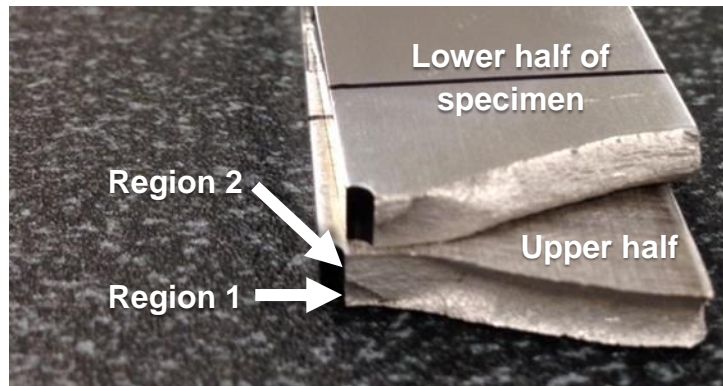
5A25 fracture surface showing two displaced regions at notch
